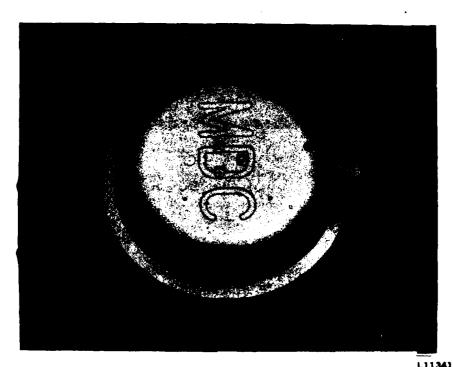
MAINWHEEL ELECTRONICS AND HUBCAP ASSEMBLY (EXTERNAL VIEW)
